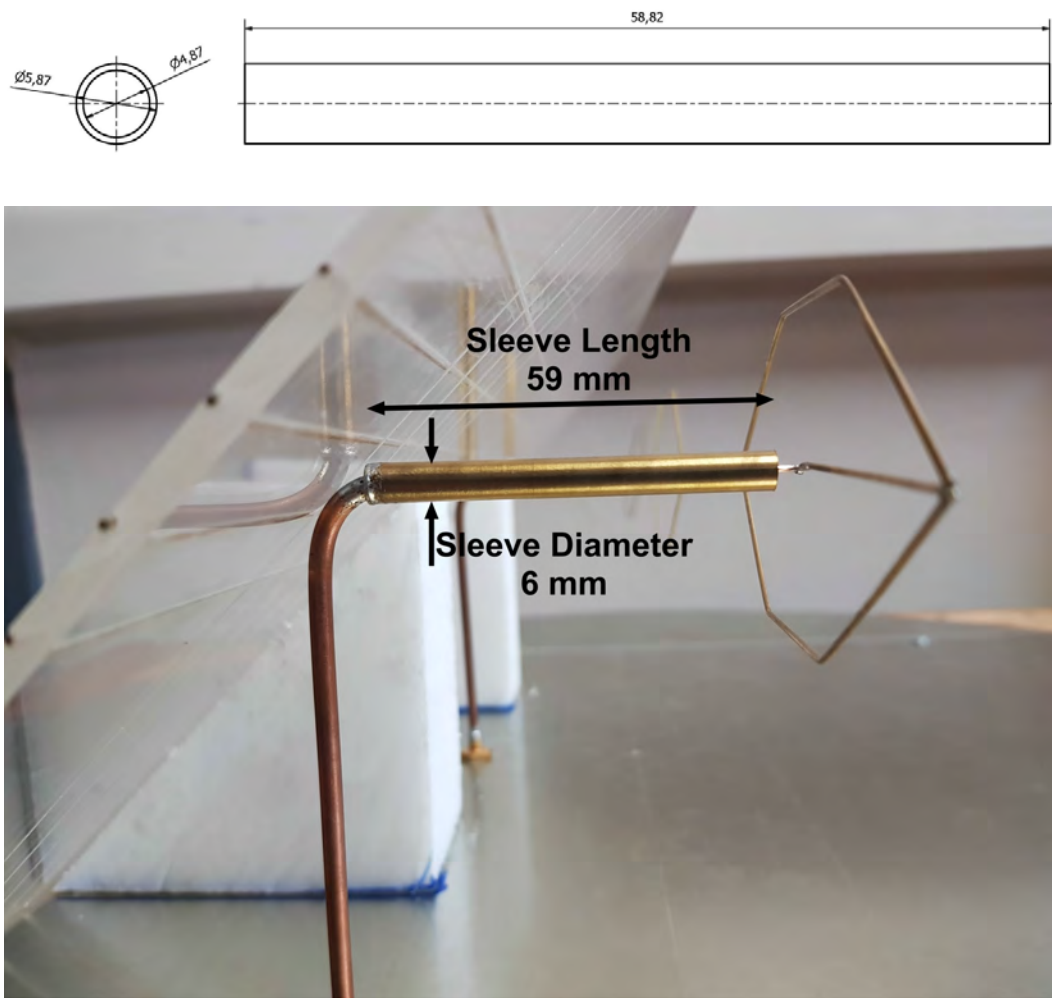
Sleeve balun design, (top) engineering drawing and (bottom) real-world scale model. The top figure of the sleeve balun shows the engineering drawing used for the manufacturing of the sleeve balun while the bottom figure shows the real-world completed part.
